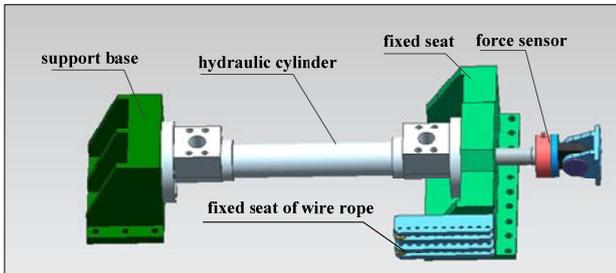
FIGURE III. THREE-DIMENSIONAL MODEL OF ACTUATOR
